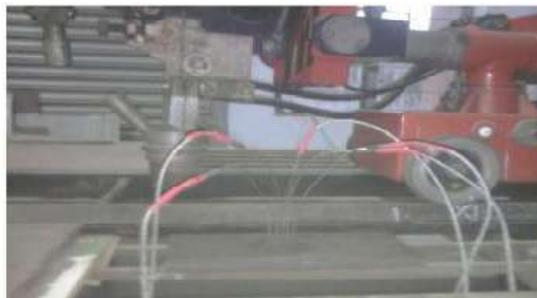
welding setup, base plate and position of thermocouple
